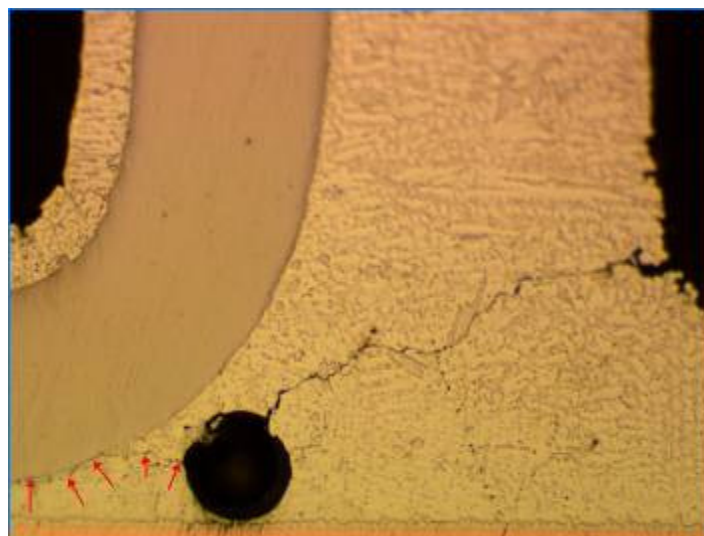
cross section, SN66, U62, left lead solder crack and void, 200xb
